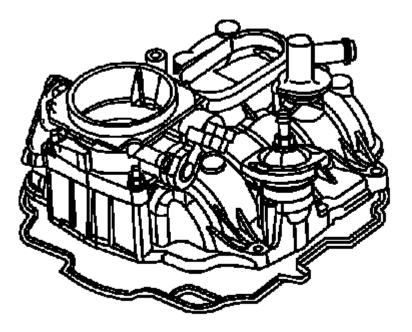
View Of Intake Manifold Upper Gasket Courtesy of GENERAL MOTORS CORP.
